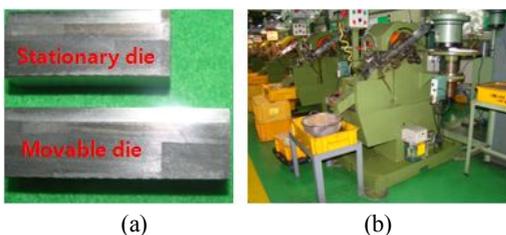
Shape of the tools: (a) flat dies; (b) rolling machine
